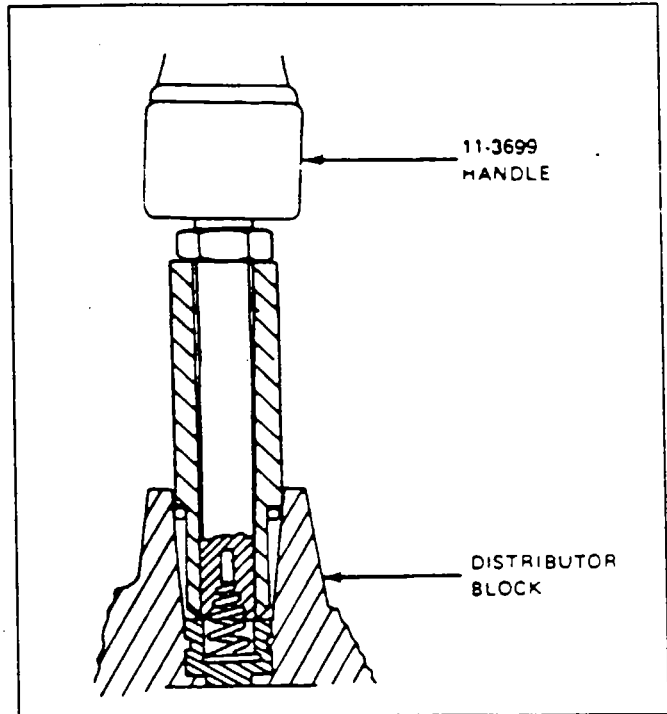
Position of 11-8627 Kit and Contact Spring After Installation
